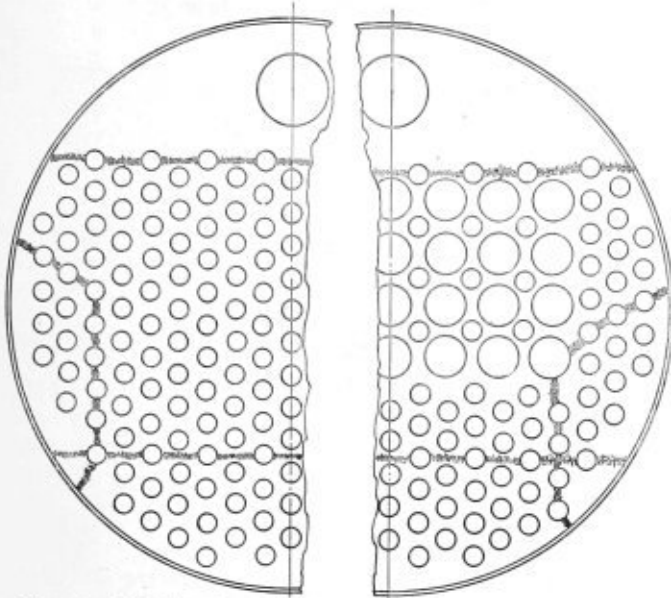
Welding Patches in Front and Back Flue Sheets
